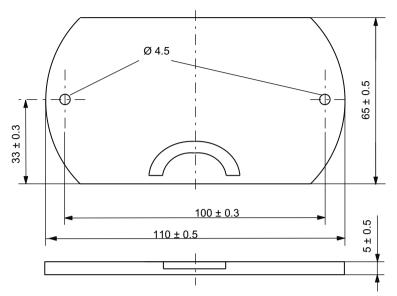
Dimension drawing of fixing pocket 6GT2390-0AA00
